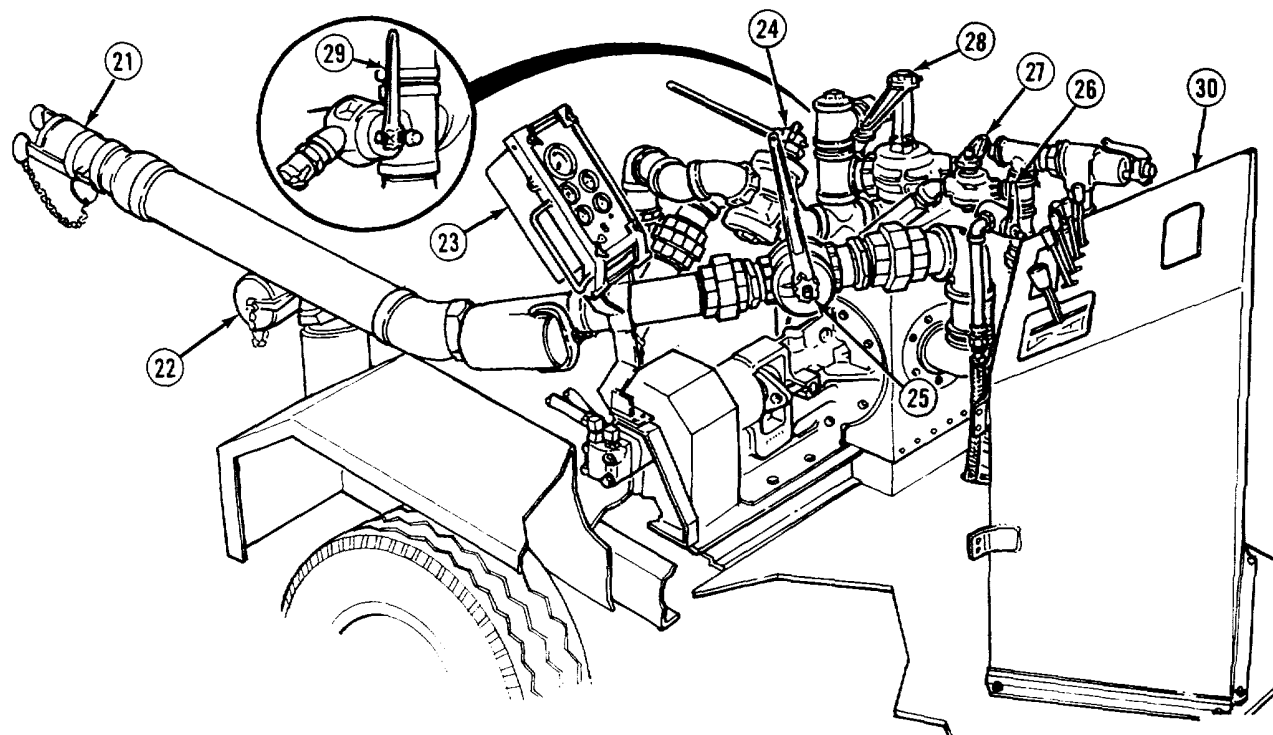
Distributor, Liquid Bituminous - Major Components (Sheet 3 of 3)
